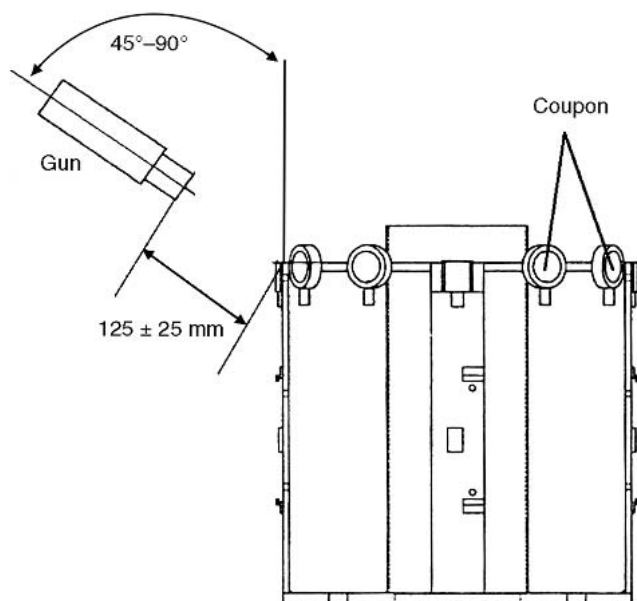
Experimental fixture and setup for both grit blasting and thermal spraying
